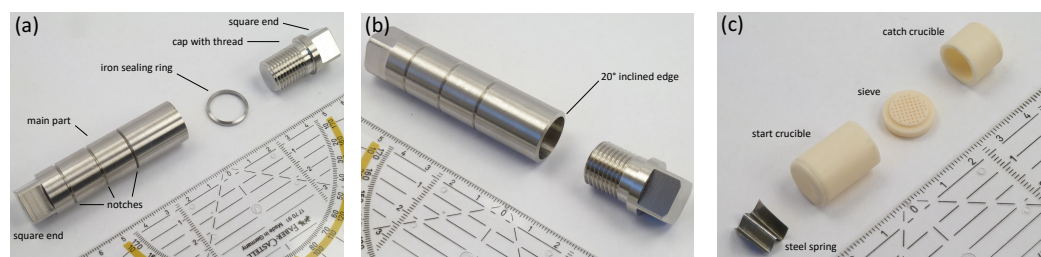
(a) A container with separate iron sealing ring is disassembled into the main part, the iron sealing ring and the cap with the thread. At top and bottom are square ends which fit into a 14 mm open-end wrench. Three notches are lathed into the main part to simplify the opening of the container. (b) The container version with integrated sealing ring is shown. The 20° incline of the edge facing towards the reader is visible. (c) Inside the steel container a steel spring, a start crucible, a sieve and a catch crucible (shown from bottom left to top right) are placed in this order. Crucibles and sieve are made from alumina.
